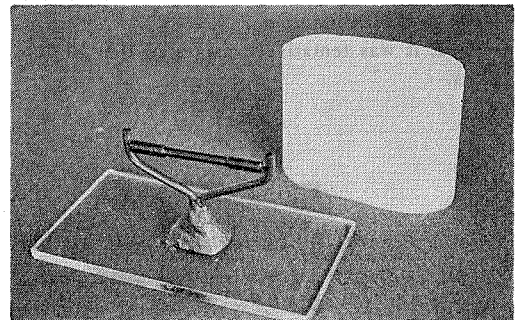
Spruing of wax test specimen along with a tensile bar, and its mold.
